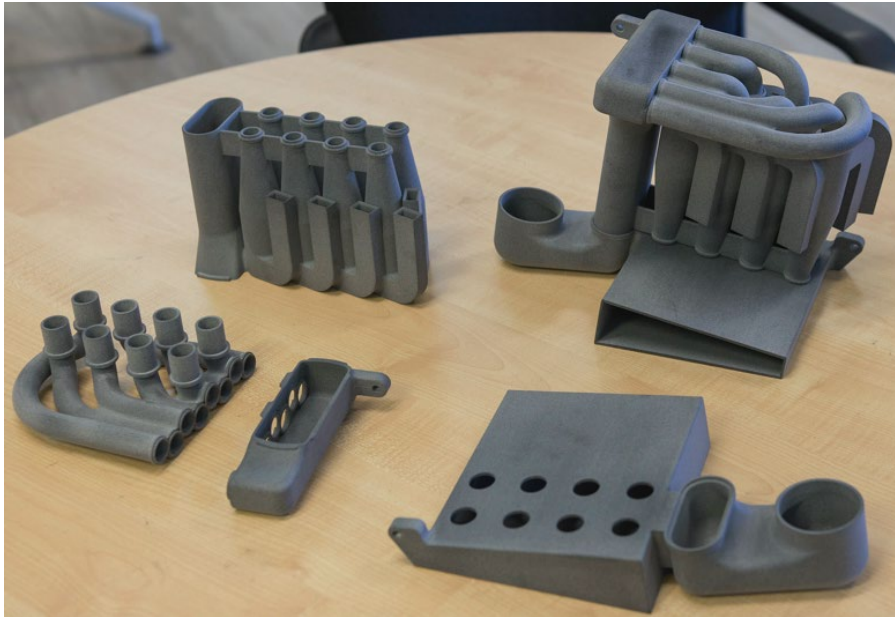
3-D Printed Parts for Cyclone & Tray Assembly
